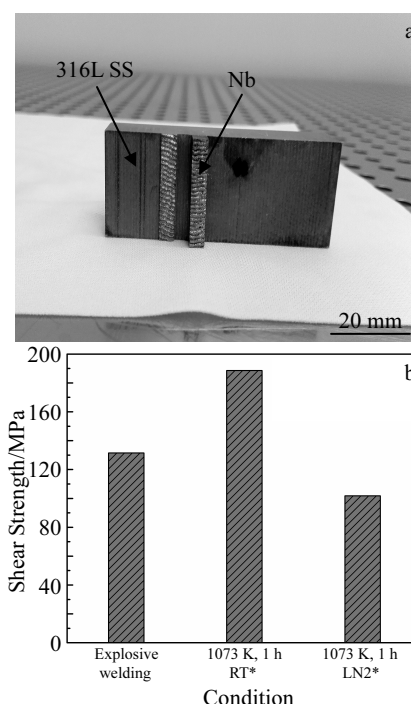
Typical fracture outlook of shear test (a) and test results (b)
